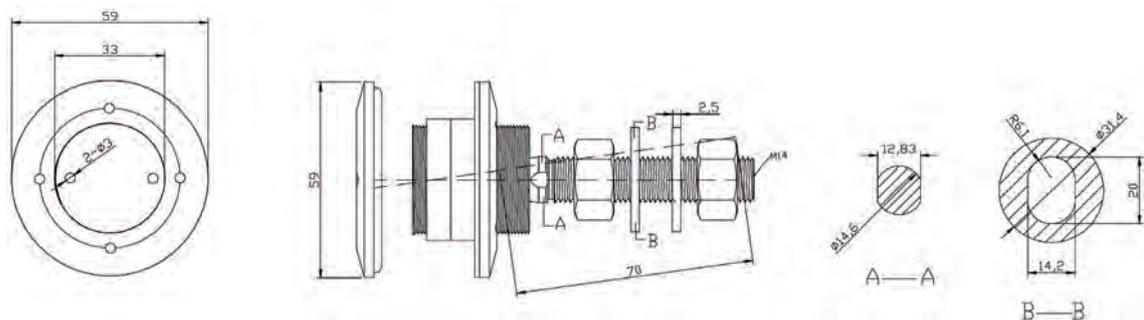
Articulated point support with fixture front plate RCT 10-21 M14: drawing
